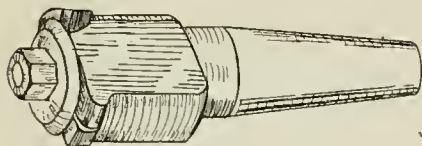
THREE CUTTER BORING HEAD FOR ROUGH BORING FORGINGS.
